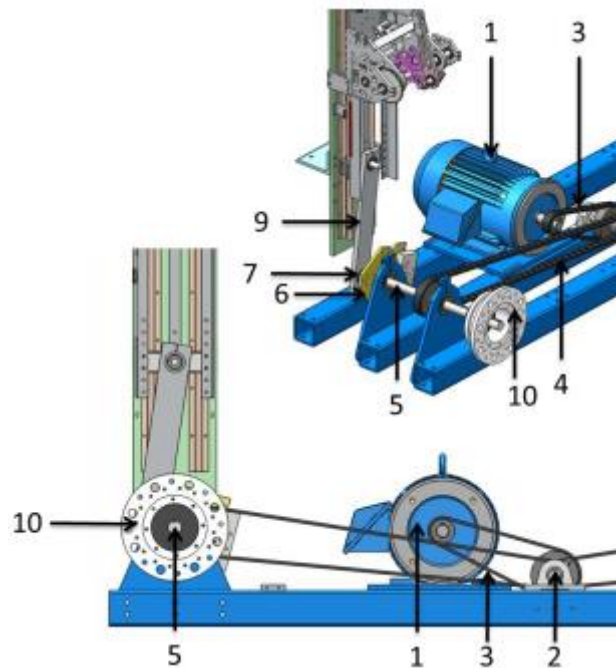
Plunge mechanism 1. Plunge Motor, 2. Main Drive Shaft, 3. Primary Belt Drive, 4. Secondary Belt Drive, 5. Plunge Drive Shaft, 6. Plunge Crank Wheel, 7. Plunge Crank Pin, 9. Plunge Connecting Rod, 10. Flywheel [2]
